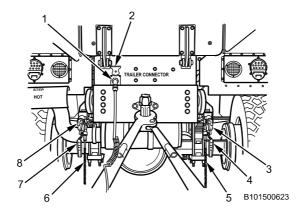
Gladhand Lines and Electrical Cable – Towing Vehicle.
